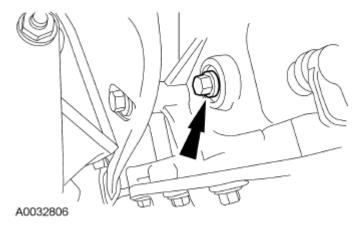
Locating Engine Plug Bolt Courtesy of FORD MOTOR CO.
